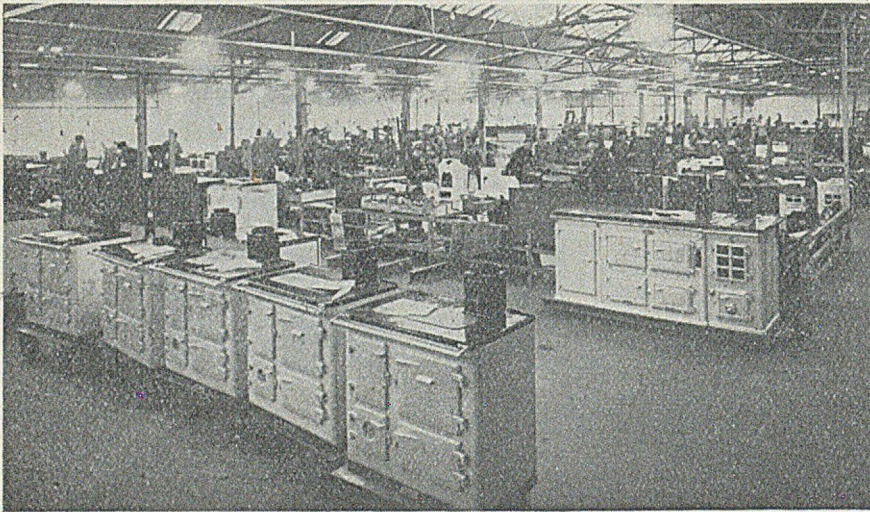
General View of one of the Spacious and Well-lit Assembly Shops.
